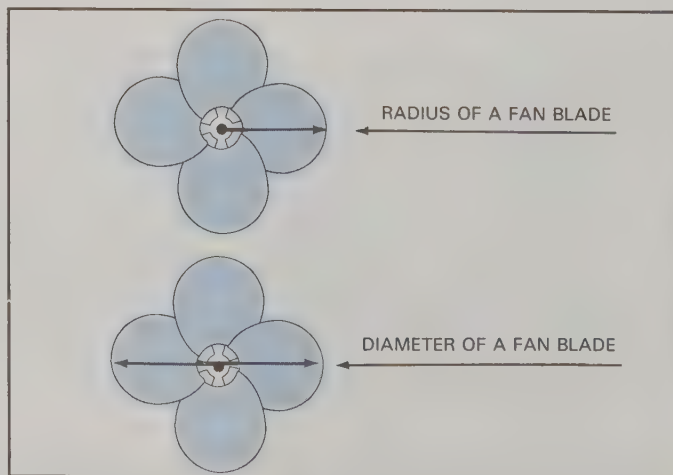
Finding the radius and the diameter of a fan blade.
